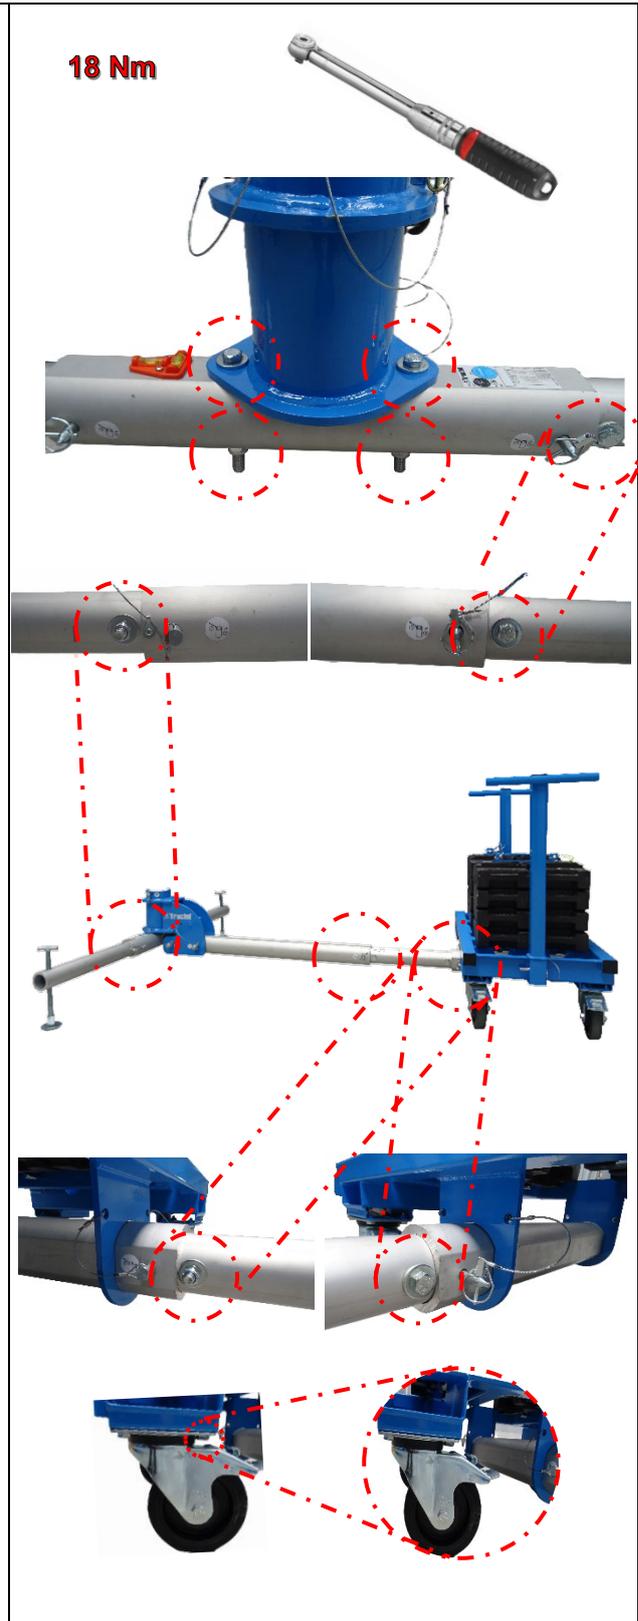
Checking the tightness of the screws on the counterweight baseplate
